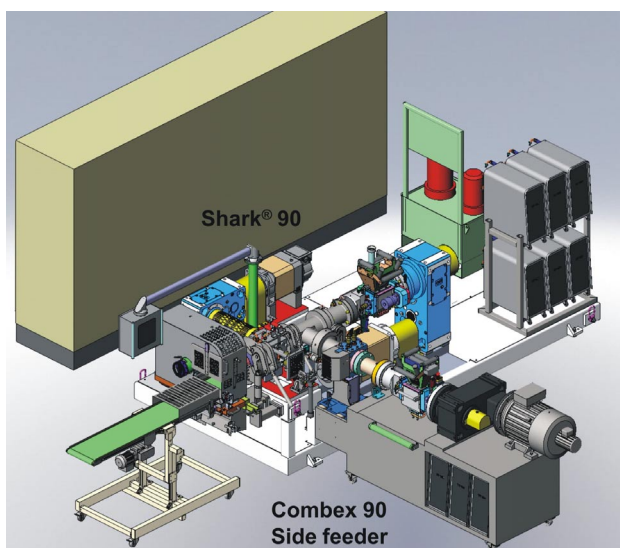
Layout of Shark® 90 with Combex 90 side feeder including cutting unit for integrated preform production
